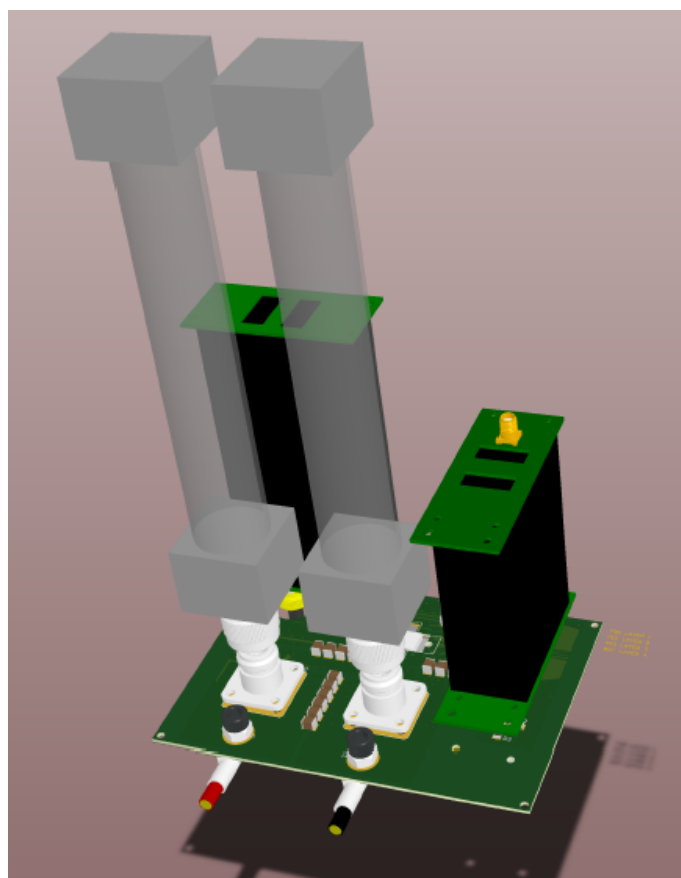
Sketch of the three devices forming the Final grid resonator. The drawing shows how they are assembled together and connected to the PCB.
